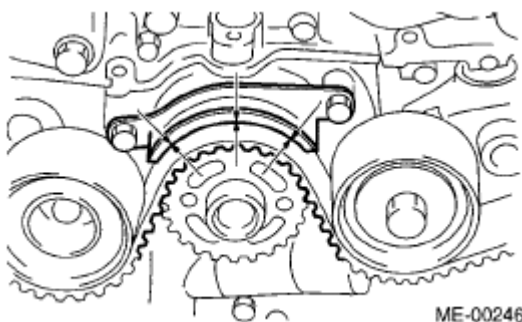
Checking Clearance Between Timing Belt And Timing Belt Guide By Using Thickness Gauge
